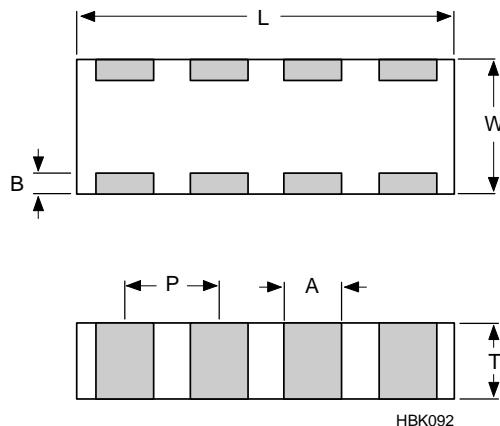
Surface mounted multilayer ceramic capacitor dimension
